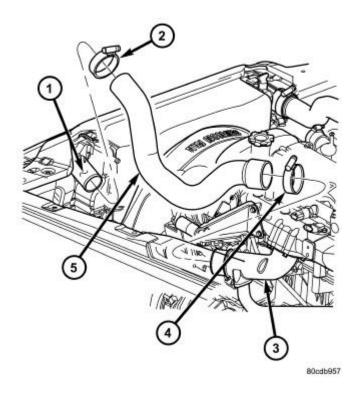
Charge Air Cooler, Hose Clamp, Intake Manifold Inlet, Hose Clamp & Charge Air Cooler Outlet Hose
